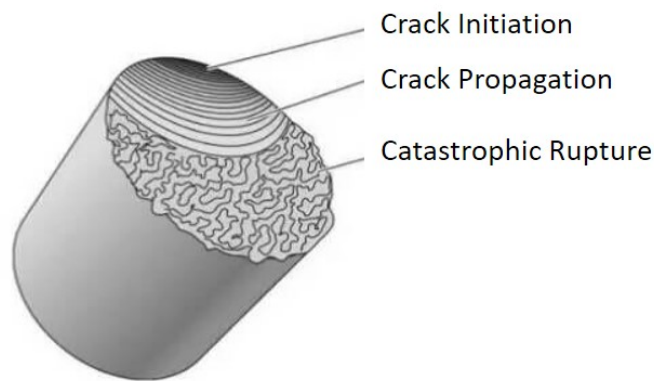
Fatigue Failure of Bolt [18]
